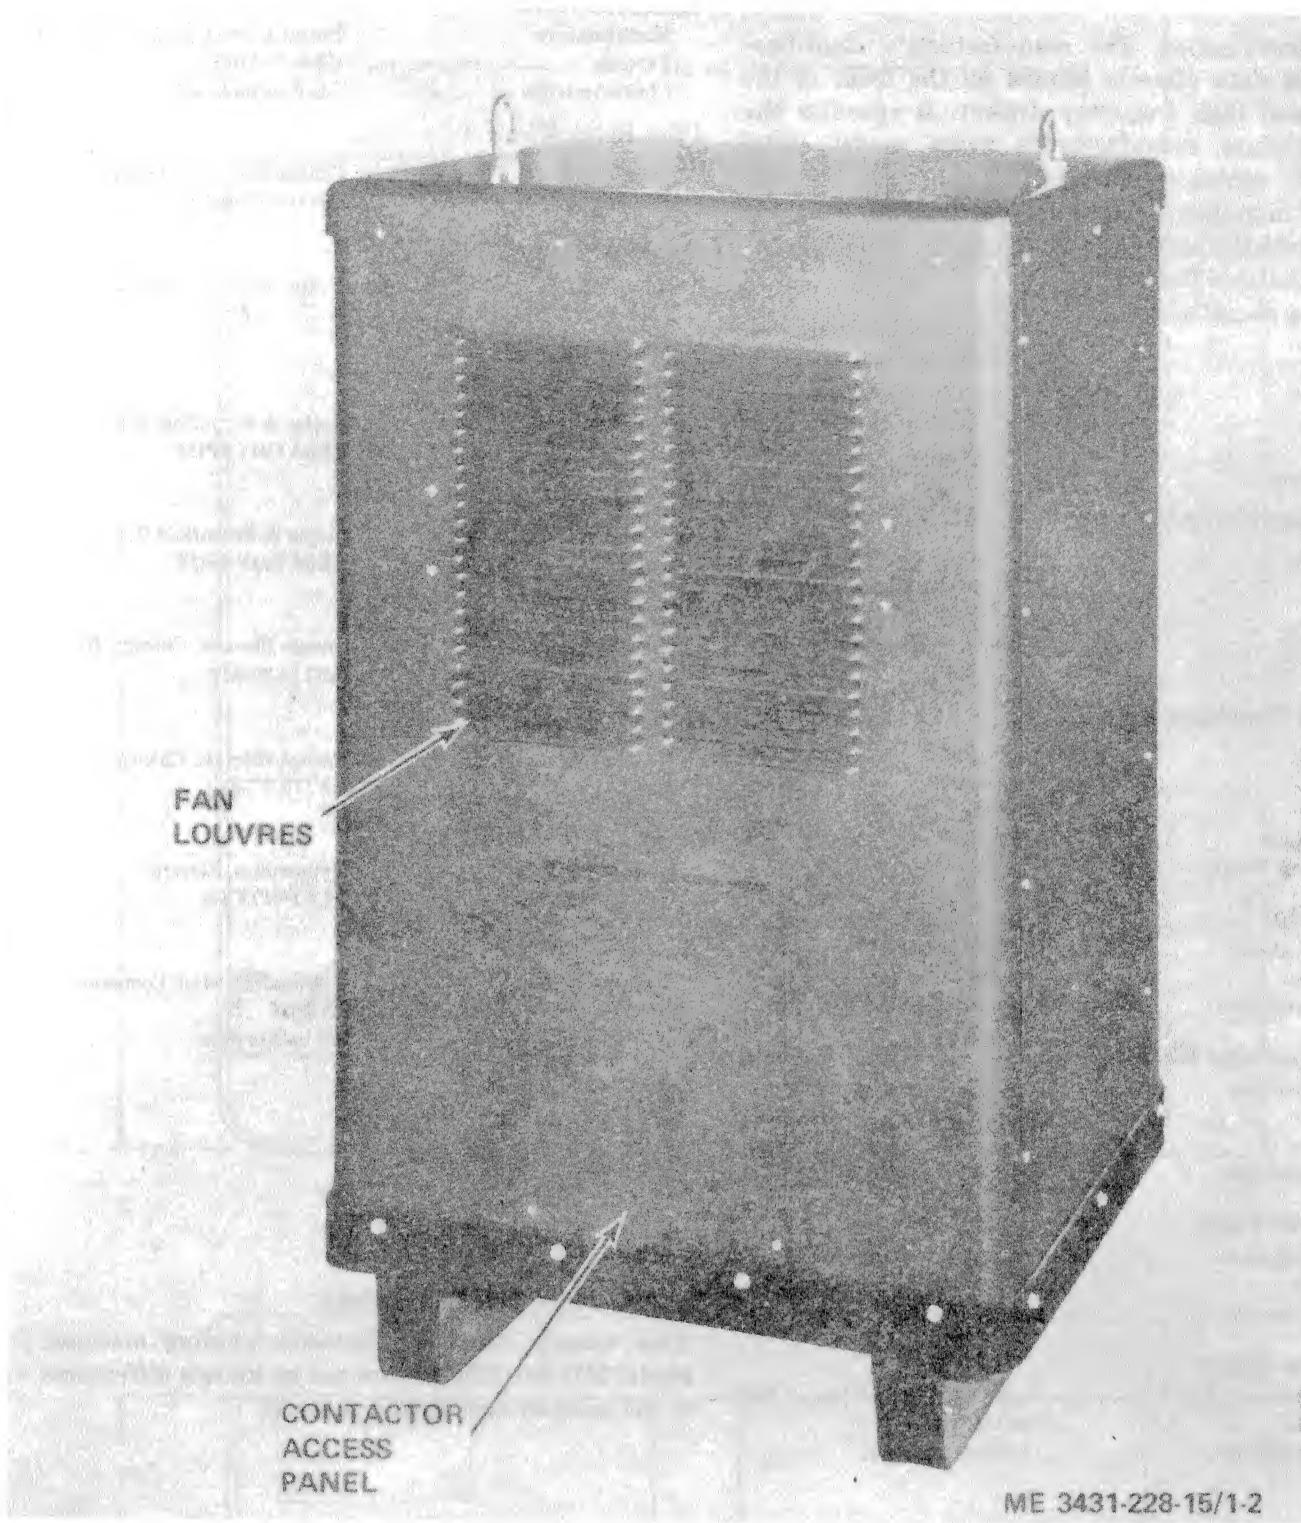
Welding machine, left rear, three-quarter view.
